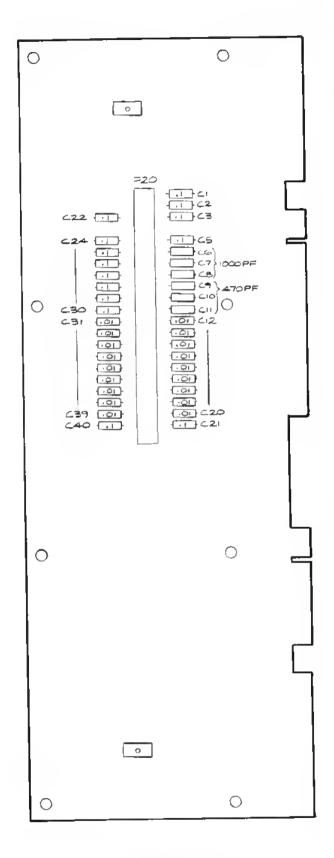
Electromagnetic Interference (EMI) Cage Assembly and Printed-Circuit Board Mounting Hardware
